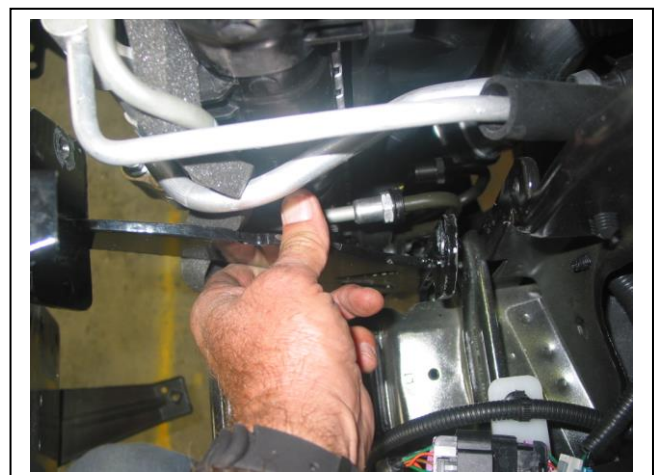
Slide ECB crash can support between chassis mounting and radiator support.
